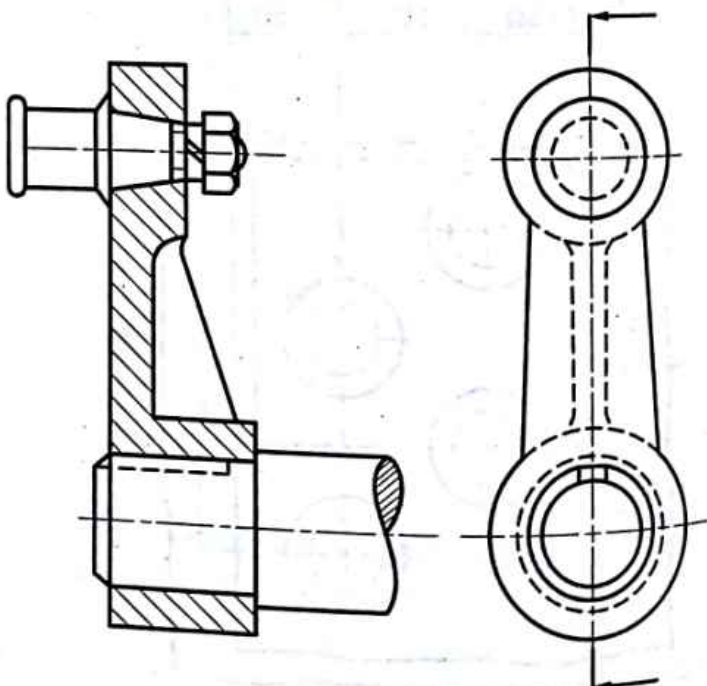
Rib, shaft and crank pin are not shown in section
